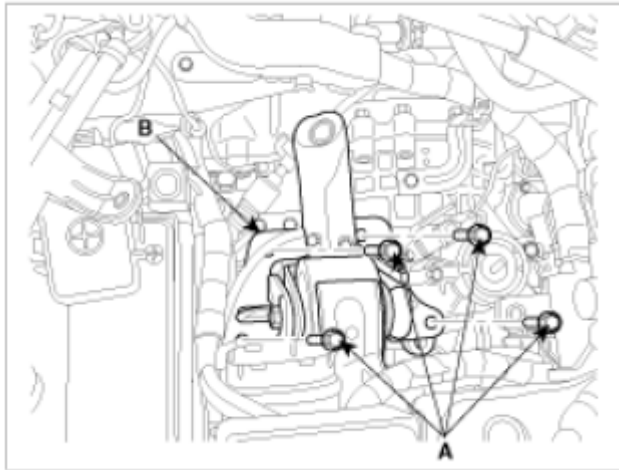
Identifying Engine Coolant Reservoir Tank And Engine Mounting Bracket
